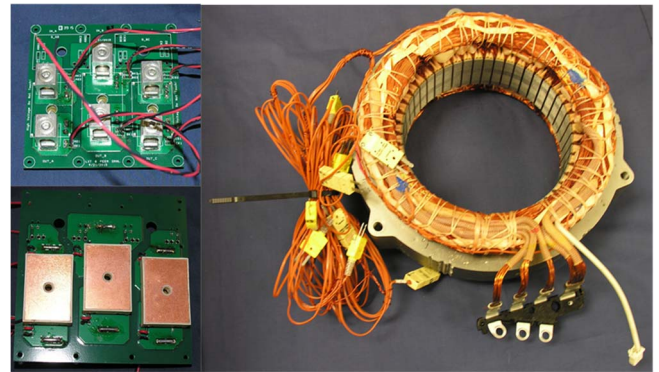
Switch-box PCB and three phase motor stator used in the test.
